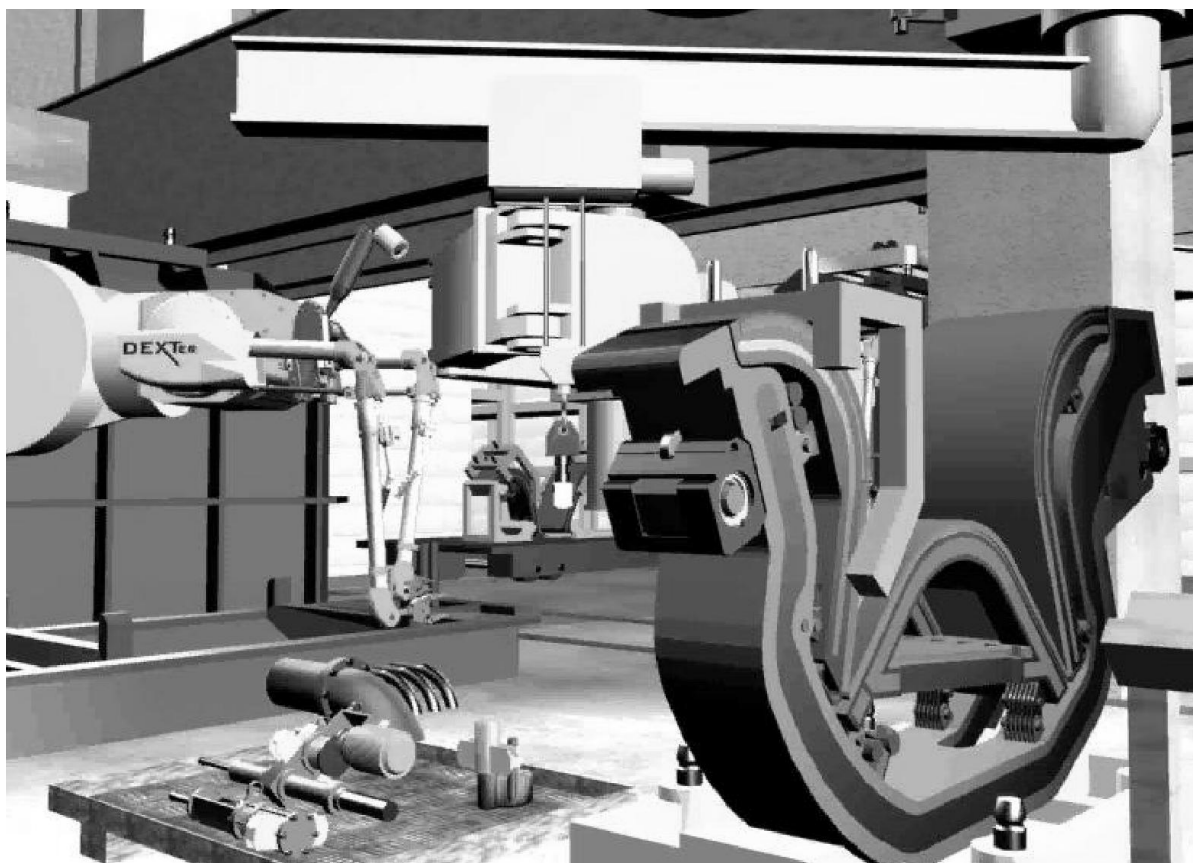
Illustration of Divertor Cassette disassembly in Hot Cell
